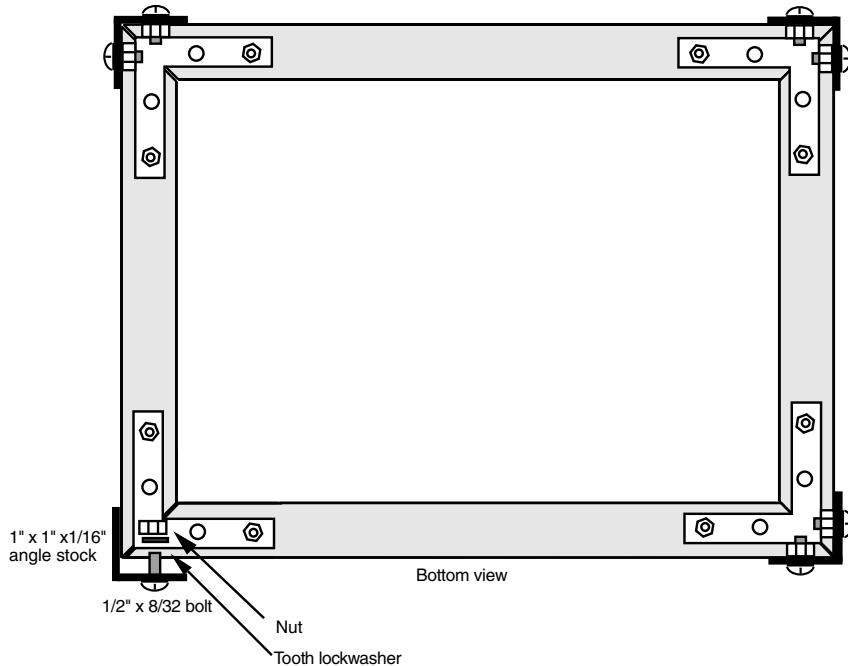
Hardware detail for securing the angle stock to the top and bottom frame pieces.
